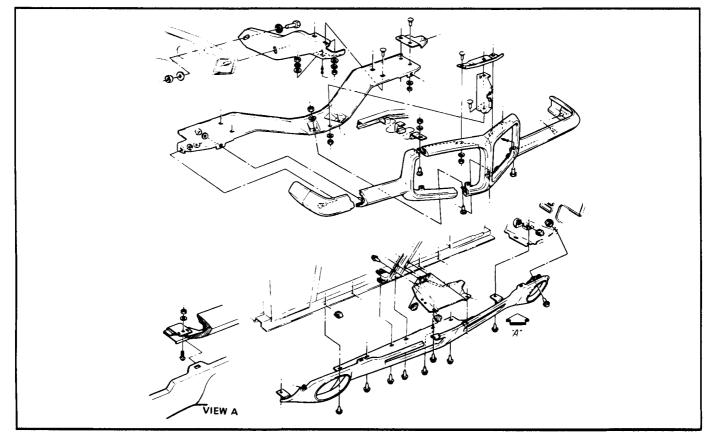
GT and G.T.O. Front Bumper and Valance Panel
